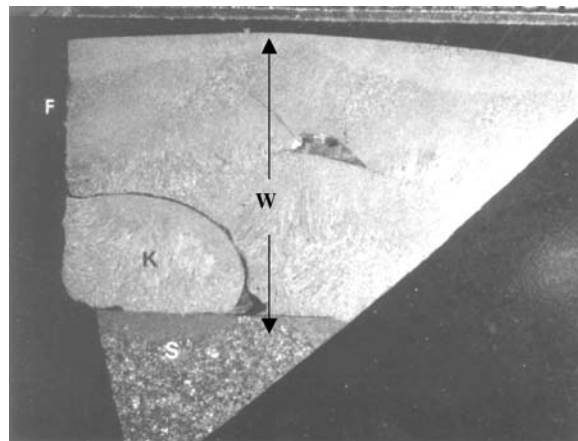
Polished and etched section, showing fracture profile (F), weld overlay (W), foreign key material (K) and original shaft material (S)
